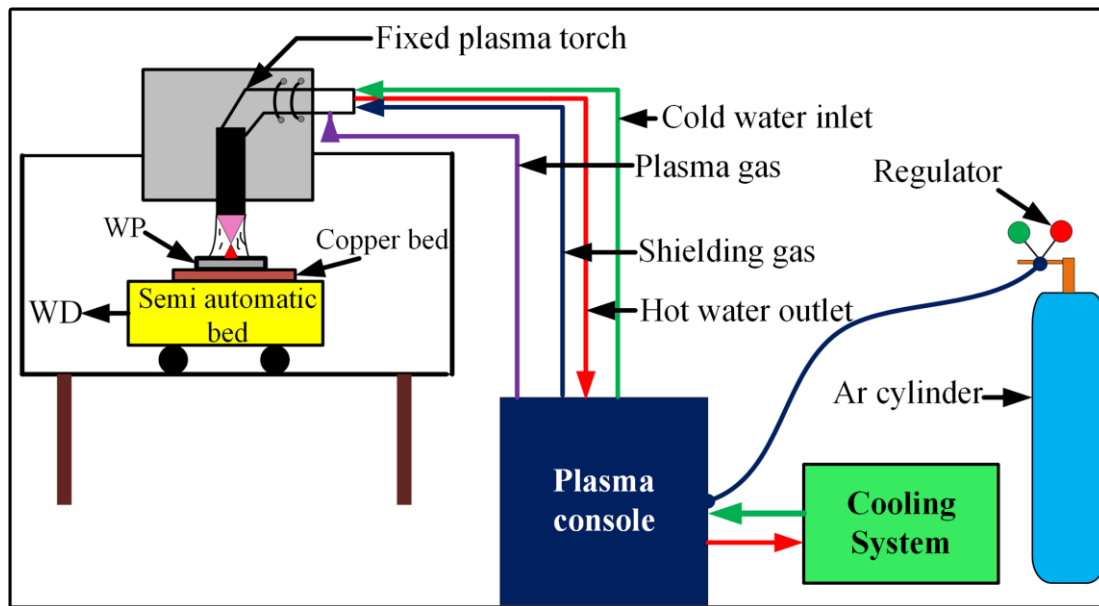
Schematic of micro plasma arc welding setup
